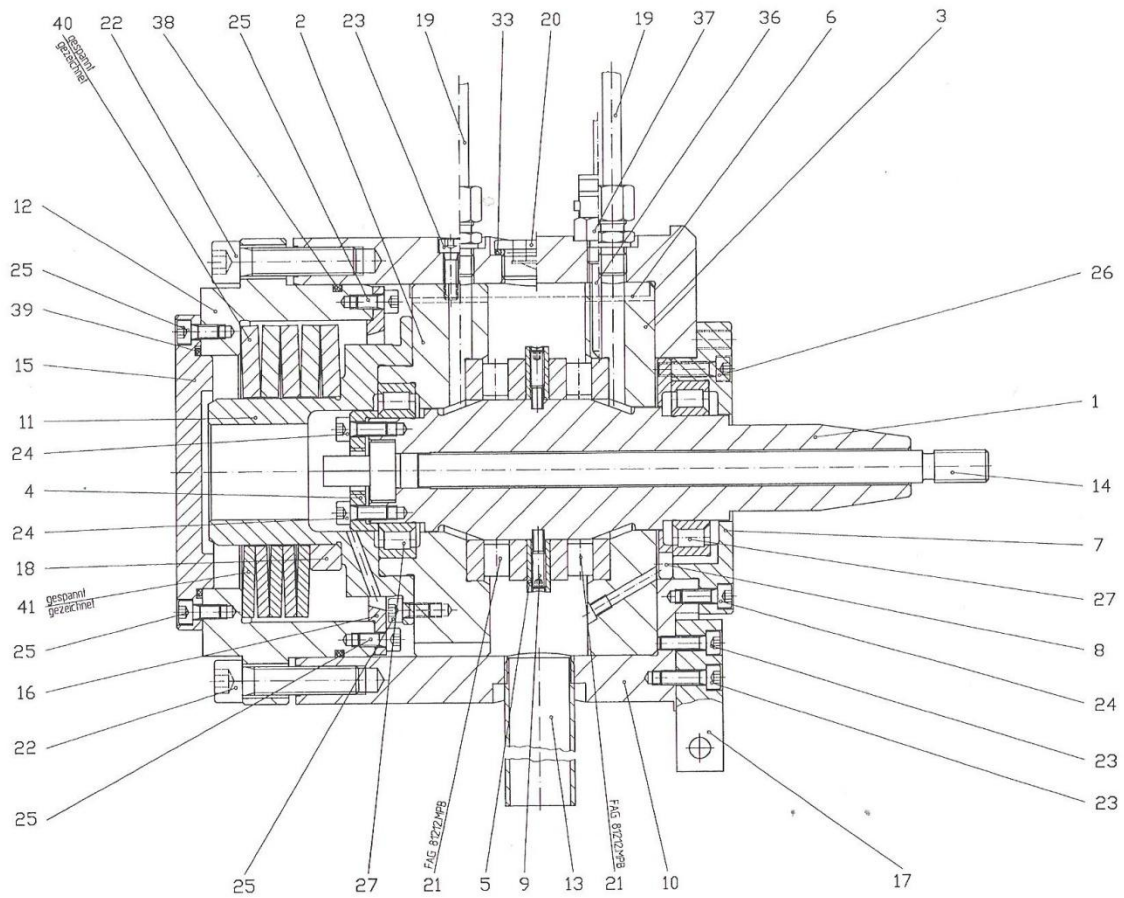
FAG FE8 Thrust bearing Head (picture courtesy: Schaeffler AG, Germany)
